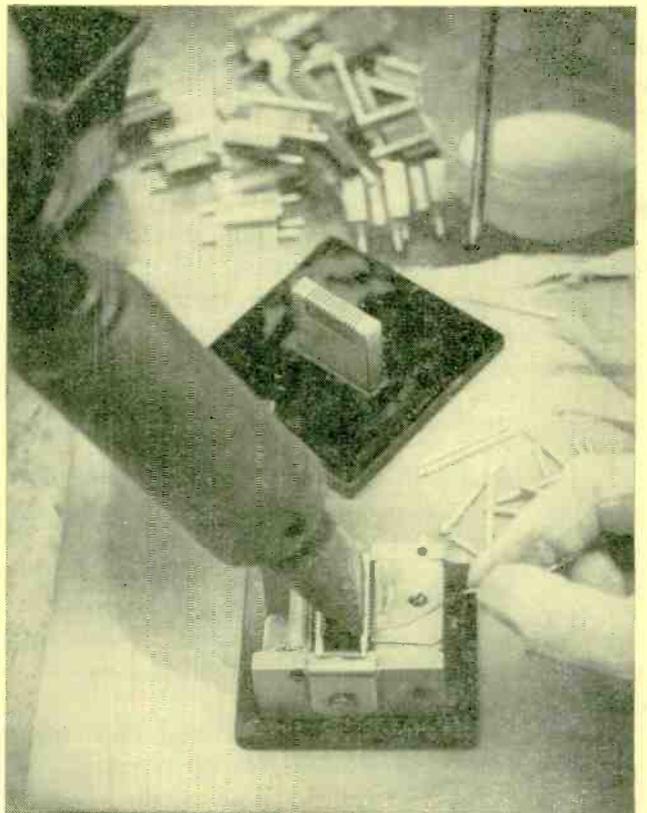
Irons of 200 watts or more are used in chassis soldering and parts fabrication
